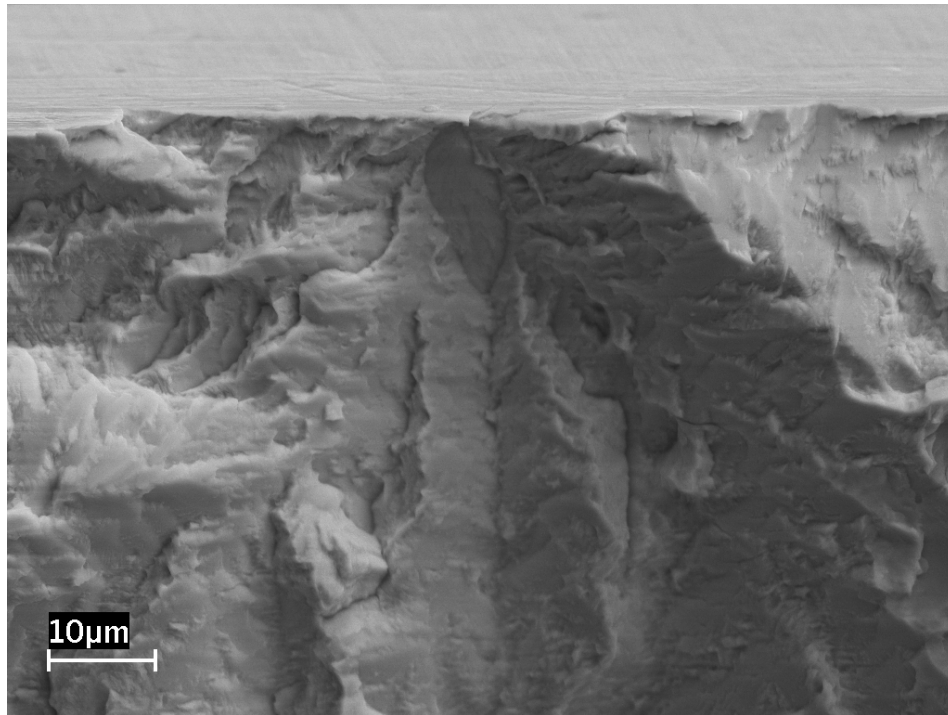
SEM photomicrographs illustrating examples of samples that failed due to fractures that initiated at particles or surface defects at the tensile surfaces of the bend samples.
